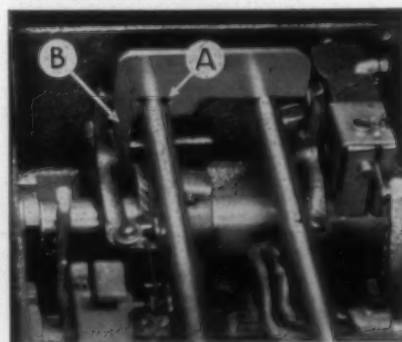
Spindle Driving Gear Locating Gauge, 90-880
